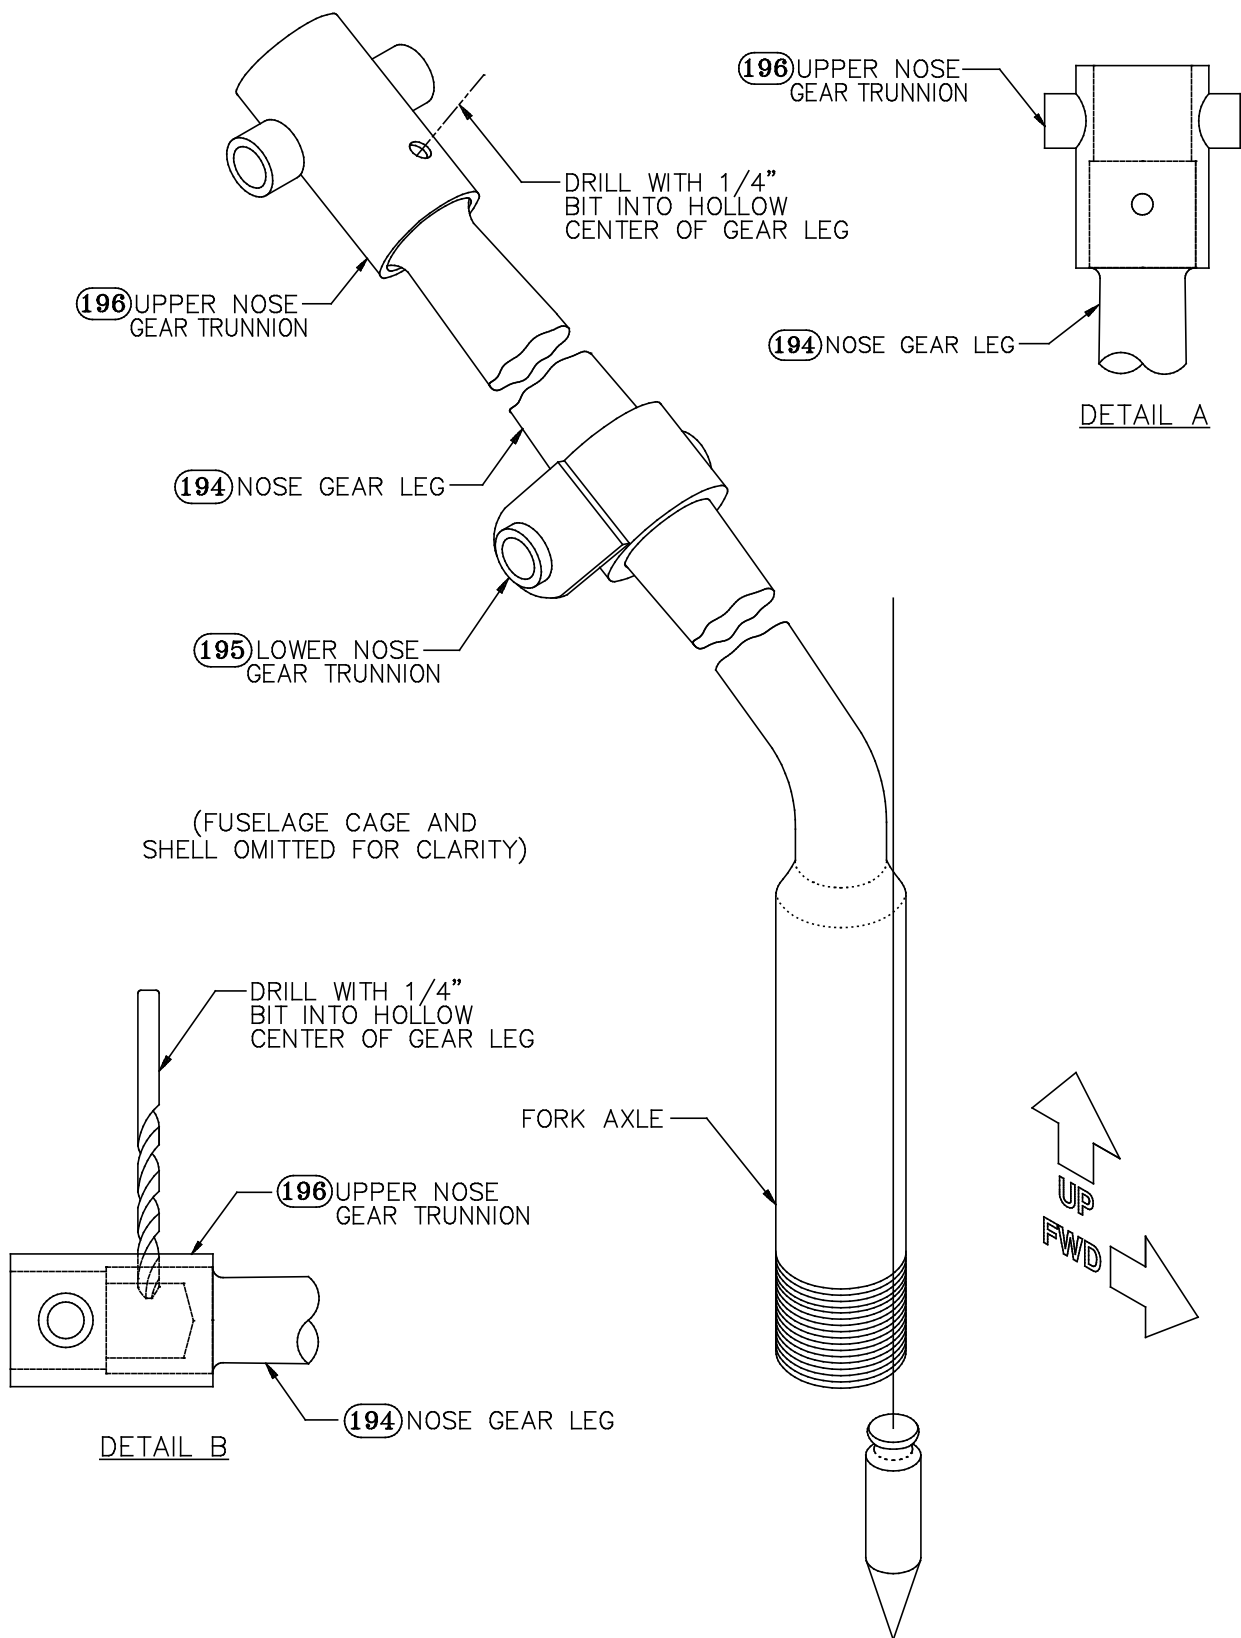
Drilling the Nose Gear Leg Bolt Hole
